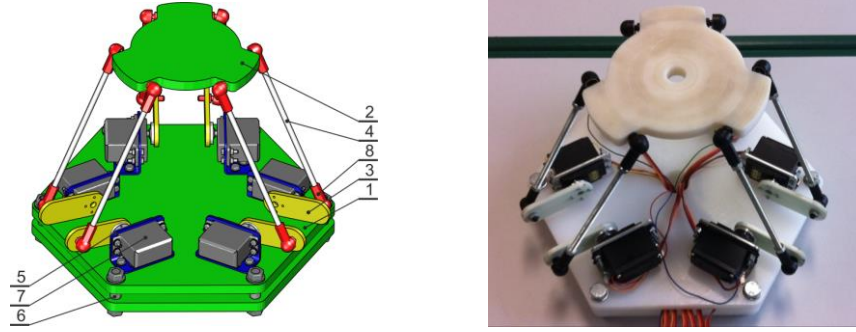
Mechanism . Solid model: 1 – base plate, 2 – moving platform, 3 – lower part of the arm, 4 – upper part of the arm, 5 – drive fixing, 6 – spacing sleeve, 7 – servo-drive, 8 – ball-and-socket joint.
